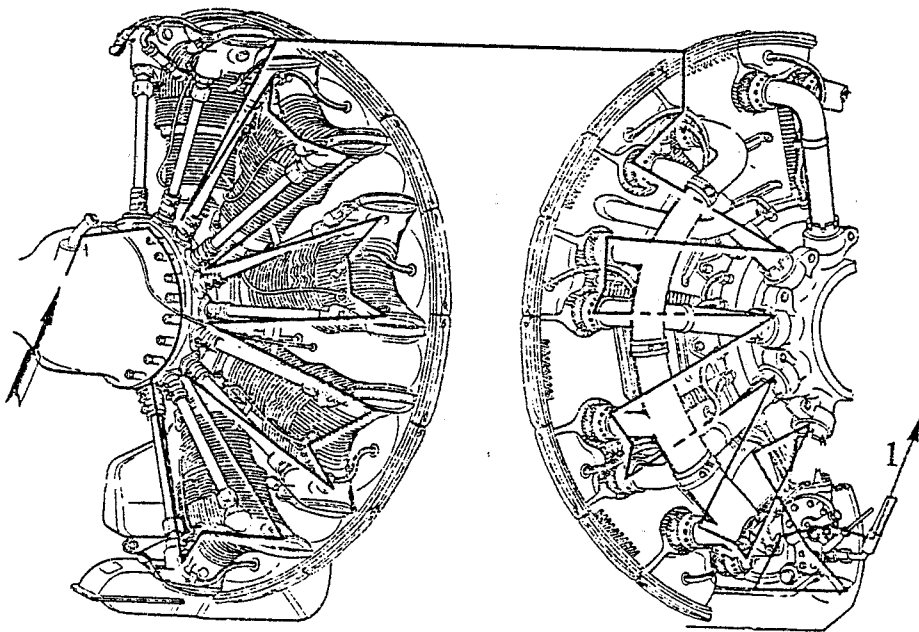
Inspection Circuit for Engine Front Left Side
